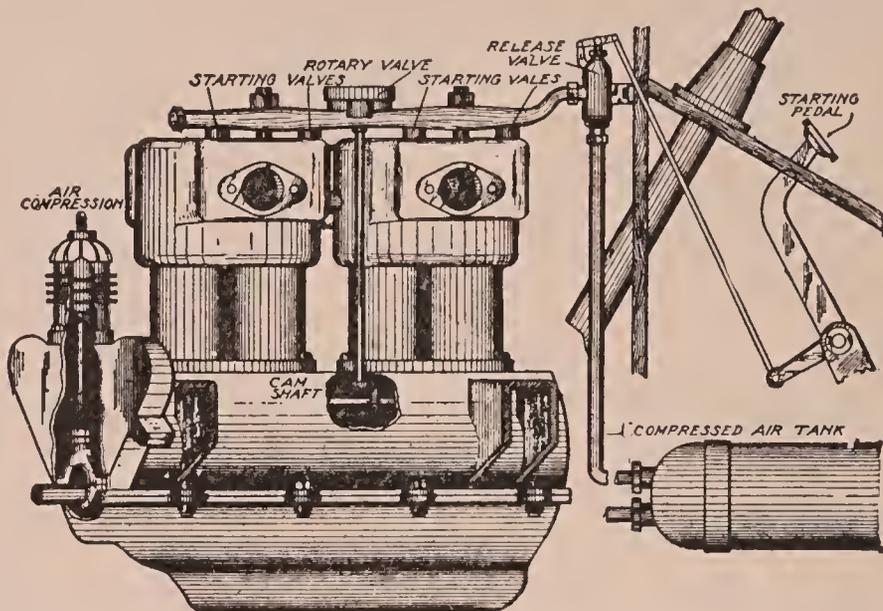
An English Air-Starting Arrangement, Indicating All the Necessary Parts and the Method of Connecting Them.
